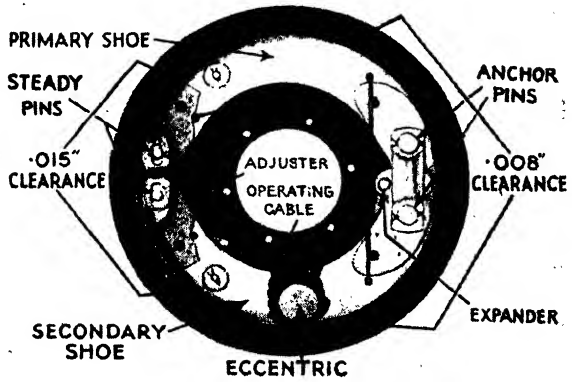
ANOTHER VIEW OF THE BENDIX BRAKE WHICH SHOWS THE SHOES AND OTHER PARTS. FOR FORWARD TRAVEL THE DRUM TURNS ANTI-CLOCKWISE, IN THIS VIEW
